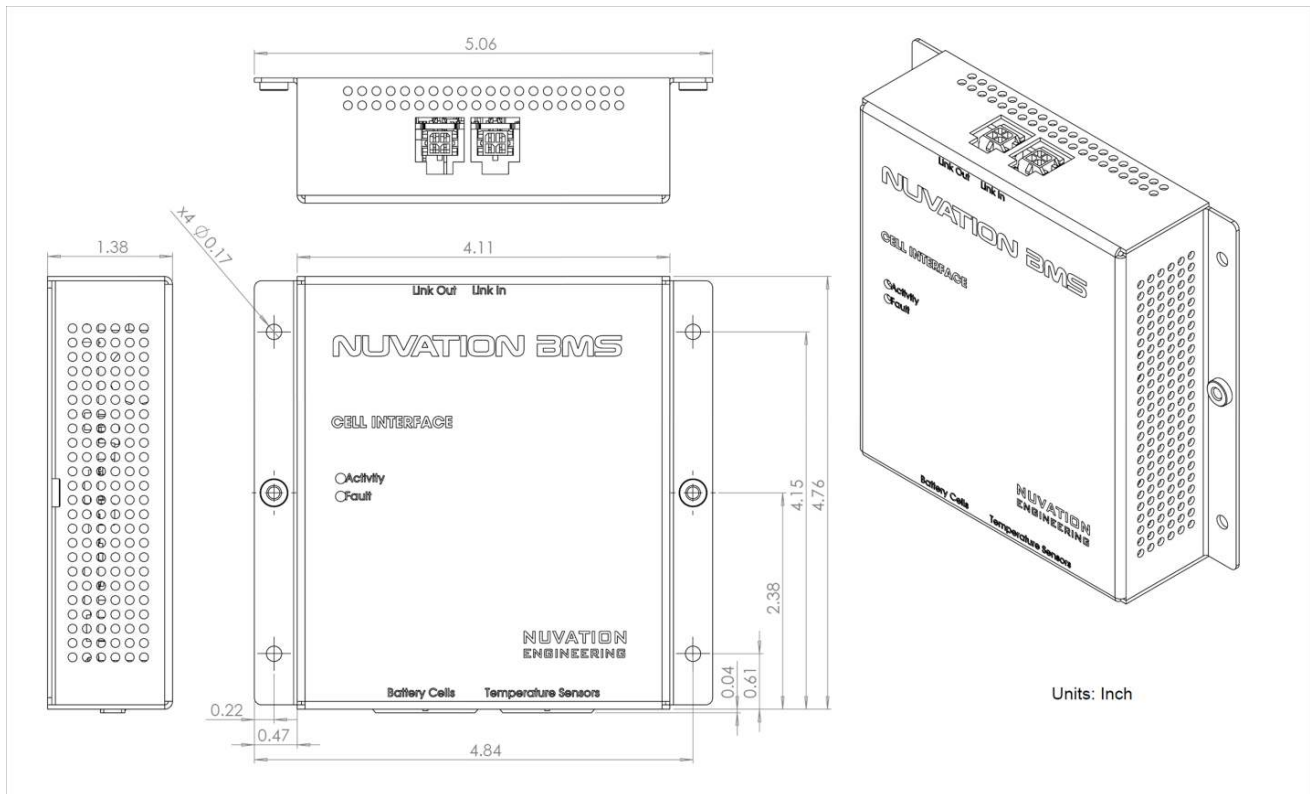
Mechanical Drawing of Cell Interface with Bulkhead Enclosure
